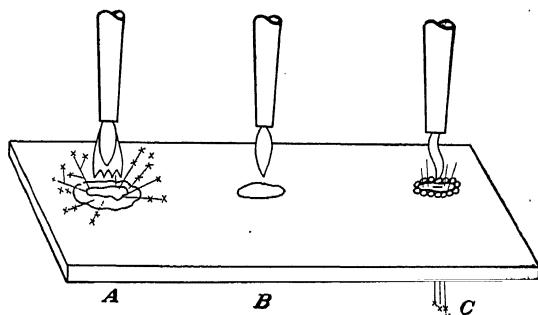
A, carbonizing flame, excess acetylene; B, neutral flame; C, oxidizing flame, excess oxygen.
